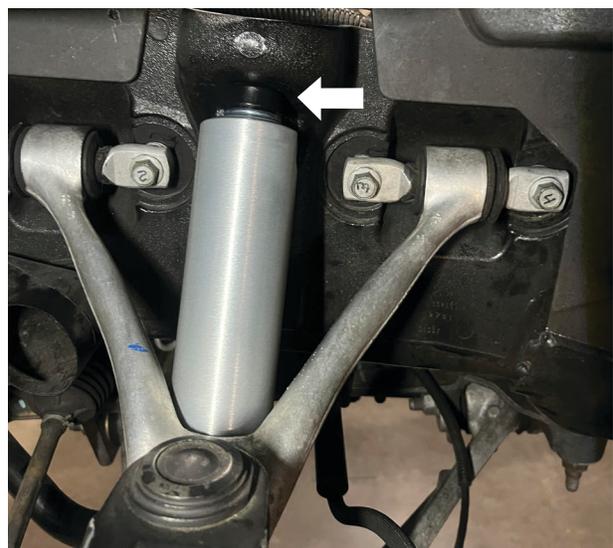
Bushing centered and seated in the chassis/shock mounting hole.
